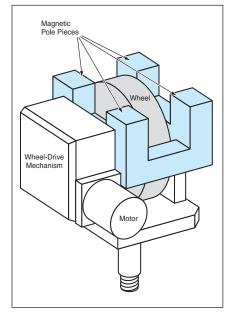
One of the Four Wheel Assemblies of the MAGMER is depicted here with the surfaceadhering ends of the magnetic pole pieces facing upward.
